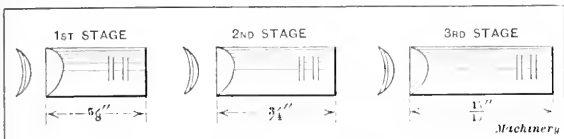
Results of Successive Operations in forming the Turbine Blades
